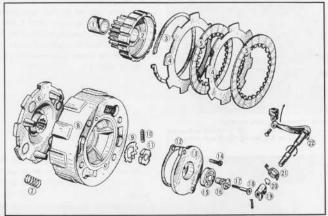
, 64 Component parts of clutch. (5.90, CL 90, CL 90 L, CD 90)
